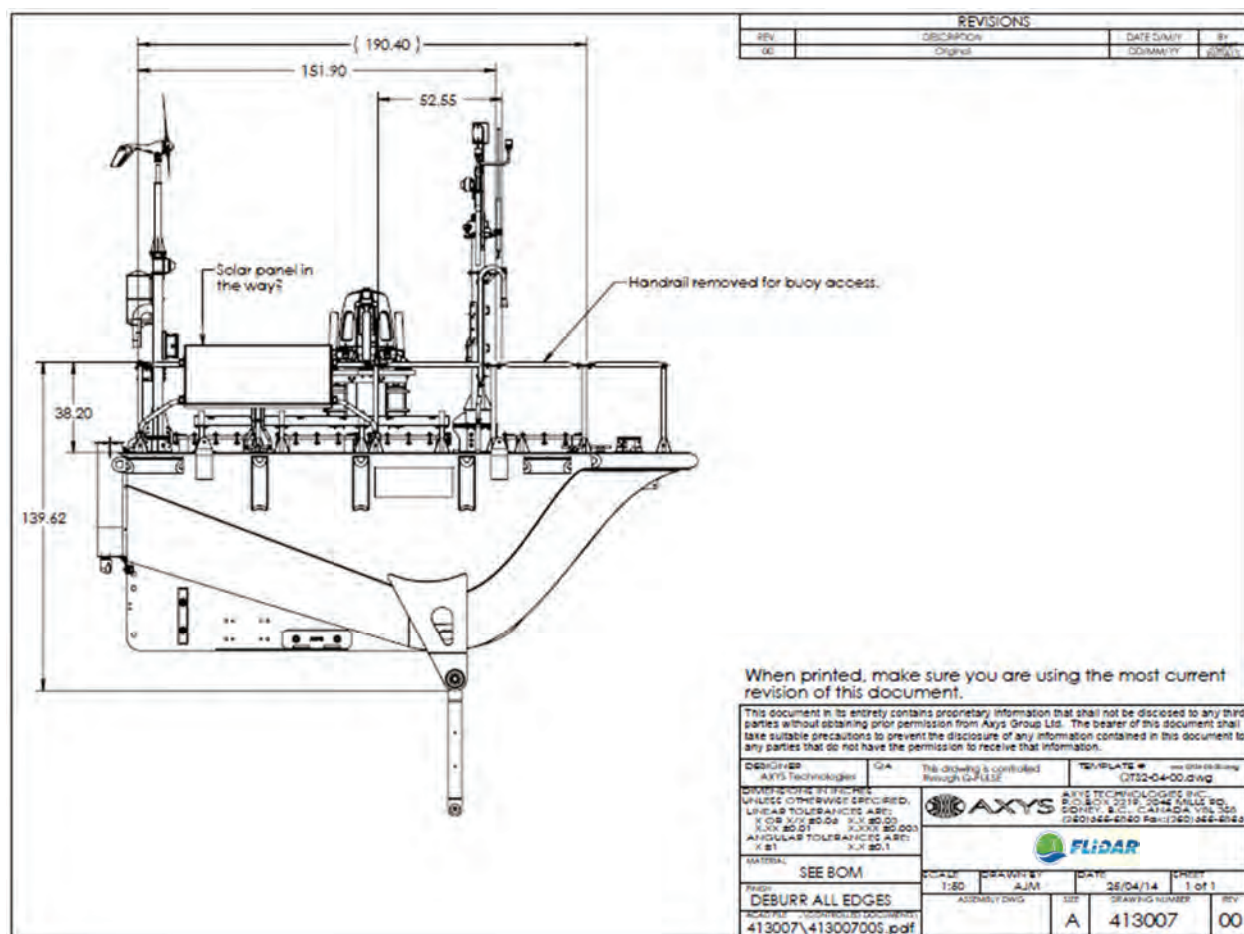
FLiDAR WindSentinel Dimensions – Dual ZephIR Deployment View
